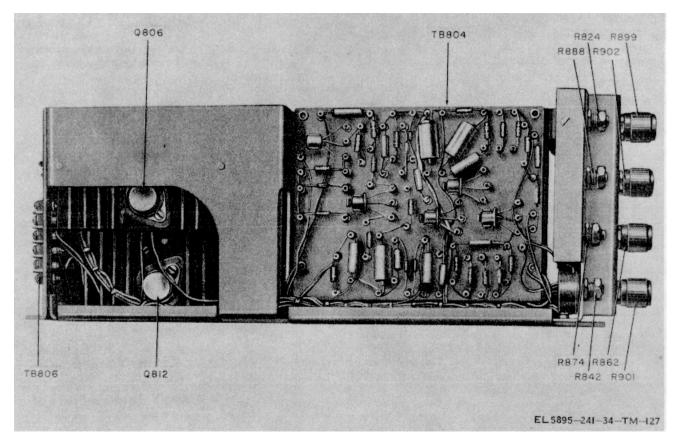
Amplifier Assembly AM-2827/FSW-8, left side view, parts location.
